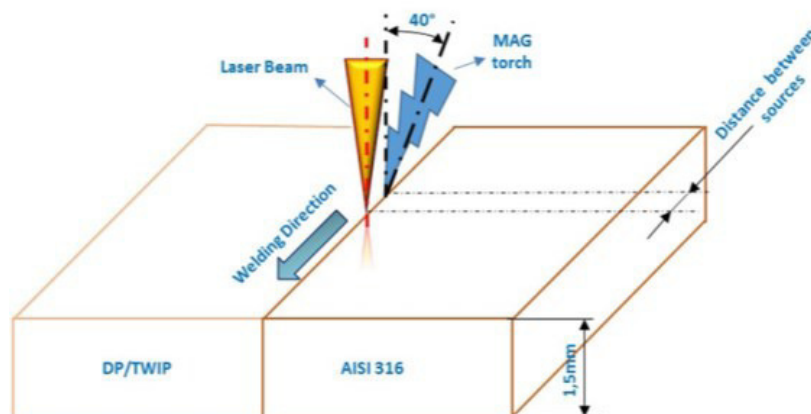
Schematic configuration of hybrid laser welding [178].
